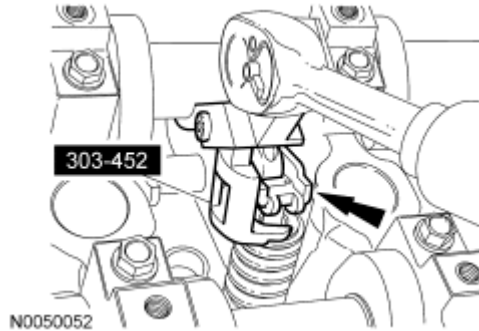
Compressing Valve Spring & Removing Valve Spring Retainer Keys Using Special Tool (303-452)
